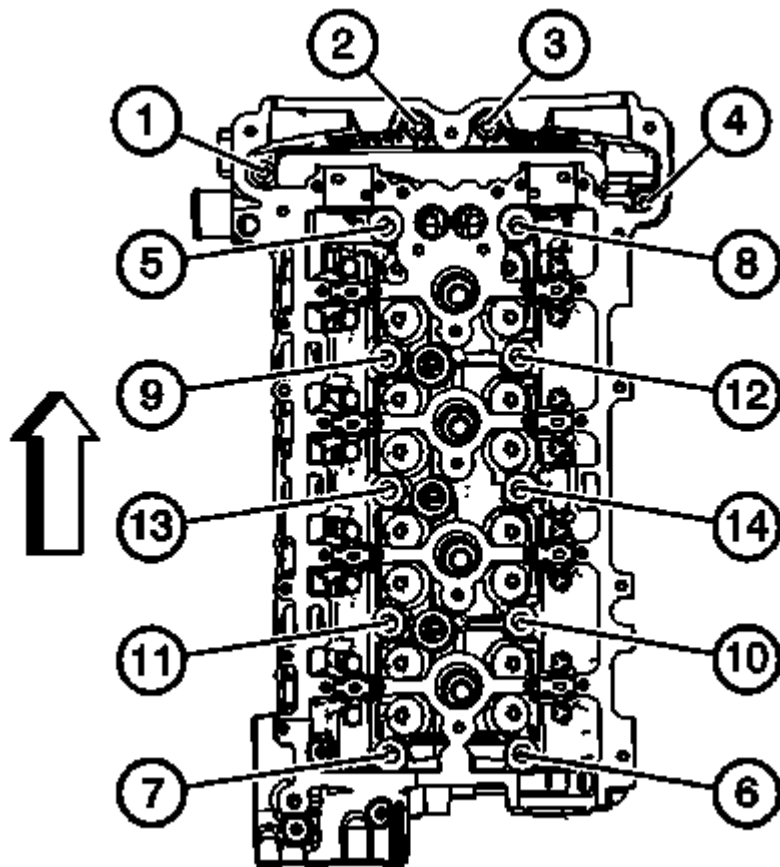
Cylinder Head-To-Block Bolt Removal Sequence
